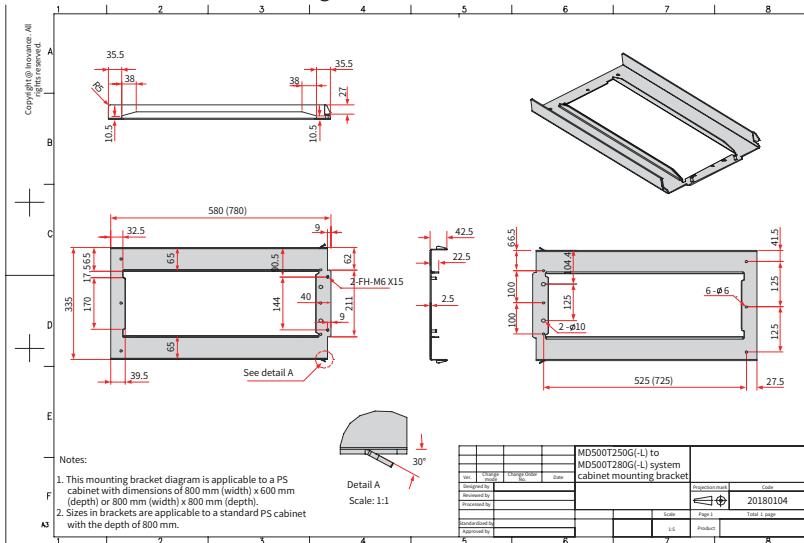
Dimensions of the mounting bracket for 250–280 kW AC drives (standard configuration) (mm)
